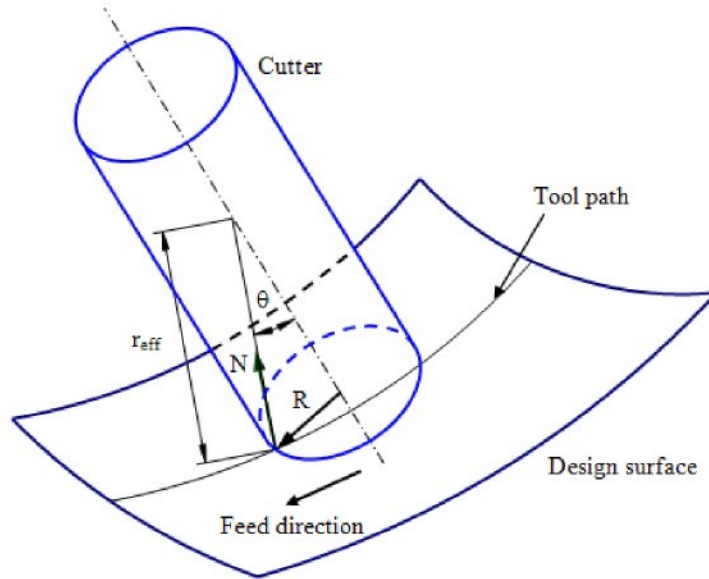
Effective radius of a flat-end cutter used for 5-axis surface machining.
